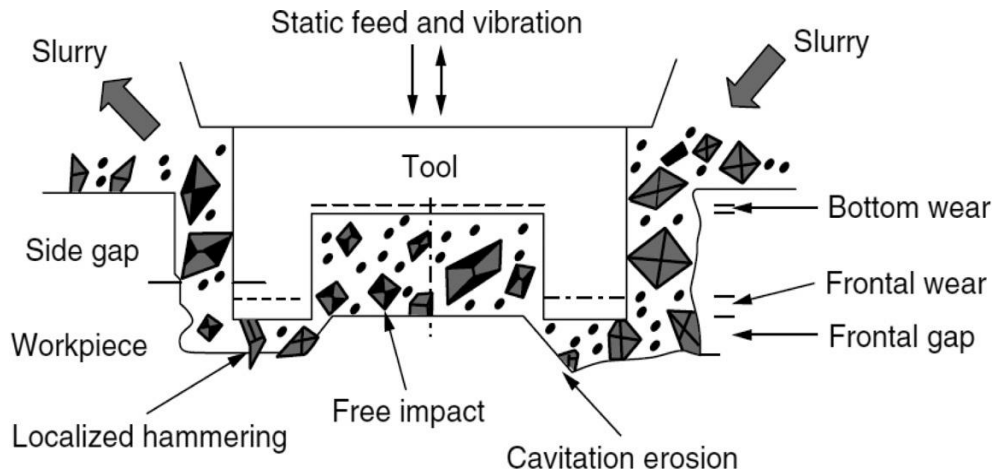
Basic mechanism of material removal in ultrasonic machining (Thoe et al., 1998)
